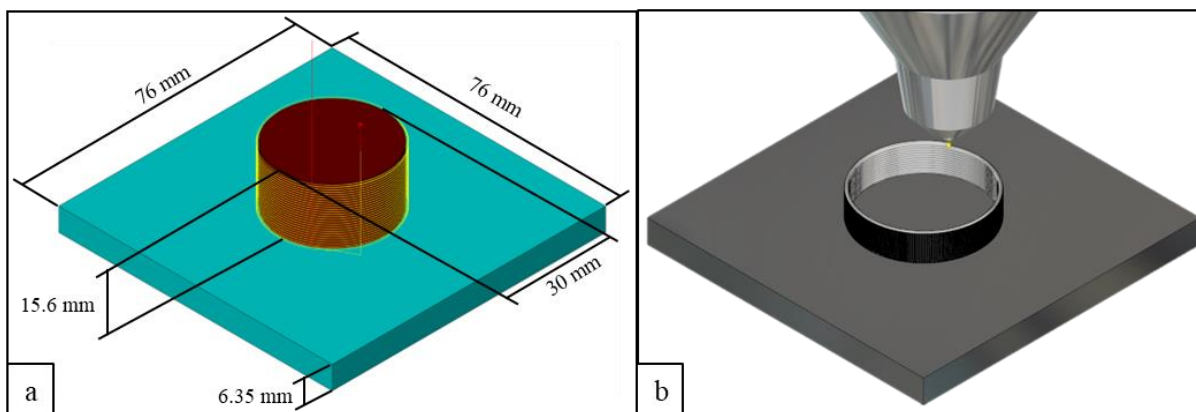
CAD/CAM 5-axis helical tool path at 0.59 mm pitch utilized for each sample where (a) isometric and (b) deposition simulation
